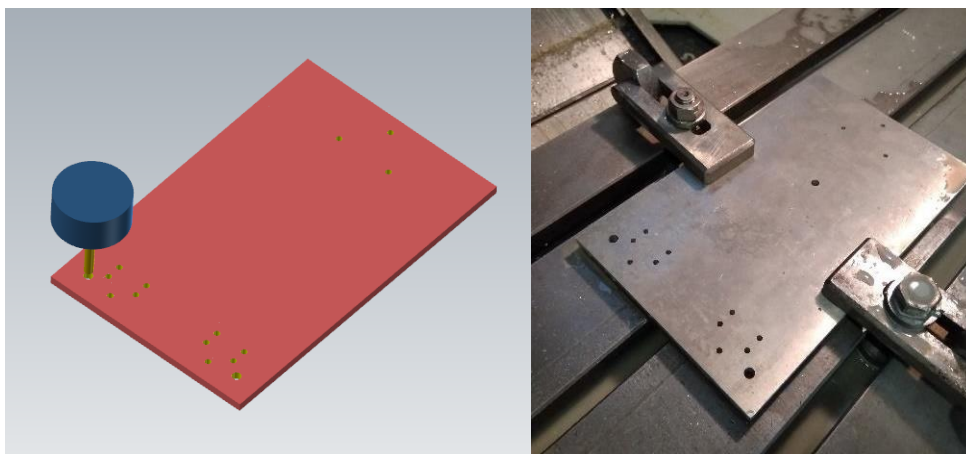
Drilling CAM cycle on the left and workpiece clamped to the worktable on the right
